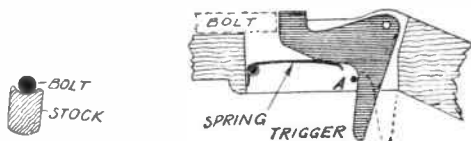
End view Fig. 4—Detail of trigger mechanism
